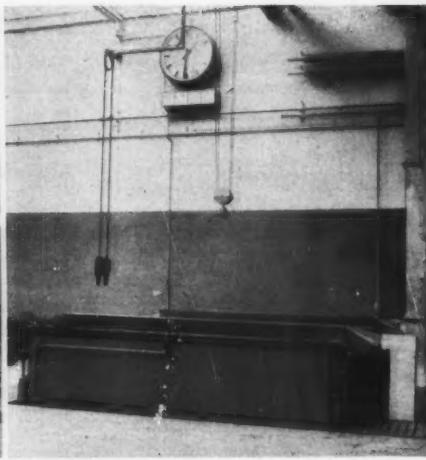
Dipping unit for treating heavily-rusted parts.
